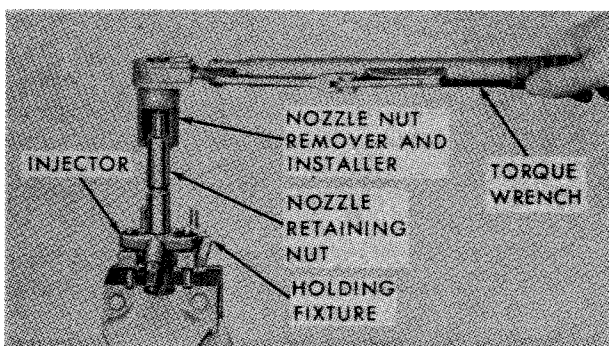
View showing injector assembly mounted on holding fixture; nozzle retaining nut is being tightened using special wrench and torque wrench.
